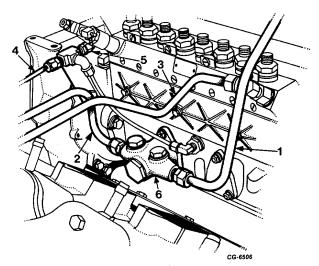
Removing Fuel and Oil Lines From Injection Pump
